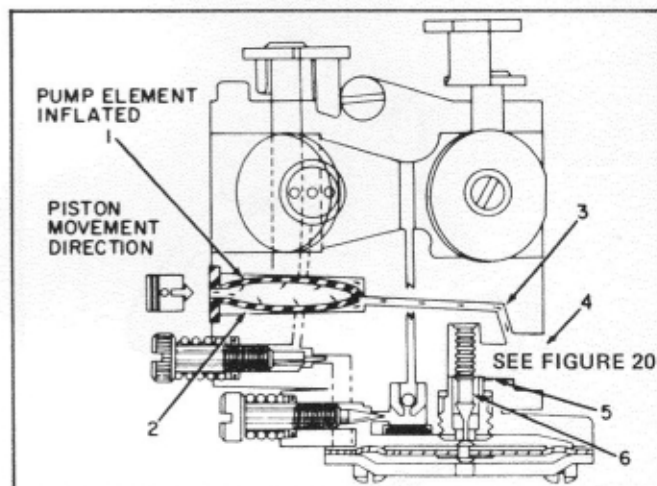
Diaphragm Carburetor with Inflated Fuel Pump
